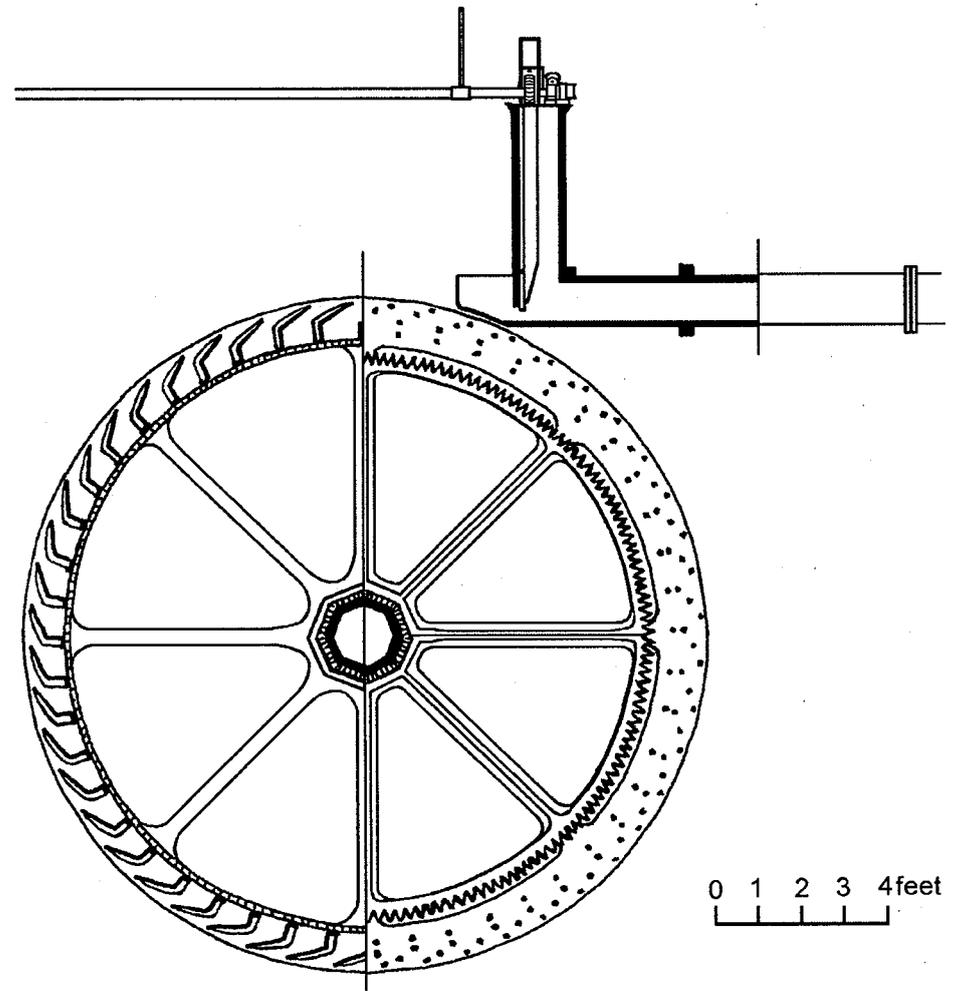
A section of the waterwheel, pitwheel, penstock and pipe based on a drawing by David Jones.
